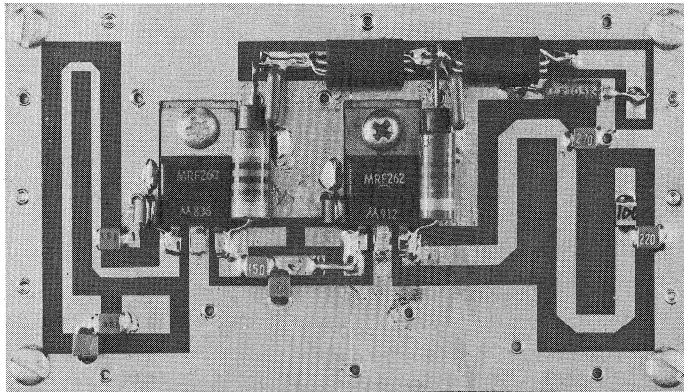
Engineering Models. A Common Board Layout is Used for Both Versions
